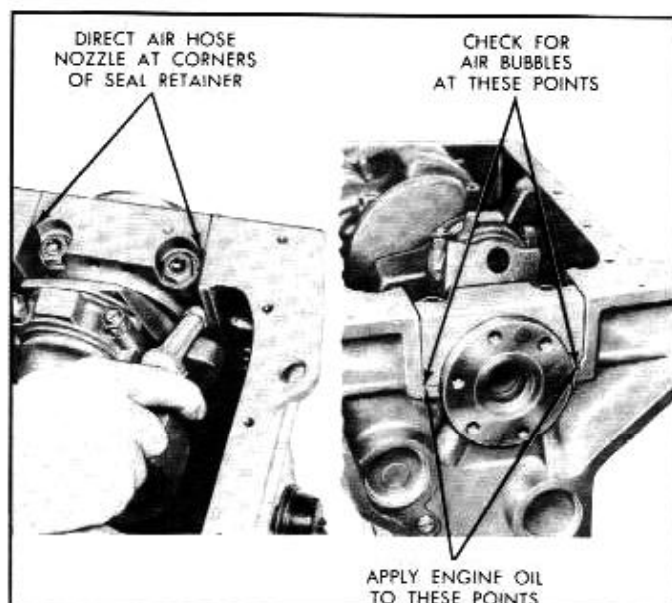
C-142—Checking Rear Oil Seals with Compressed Air
